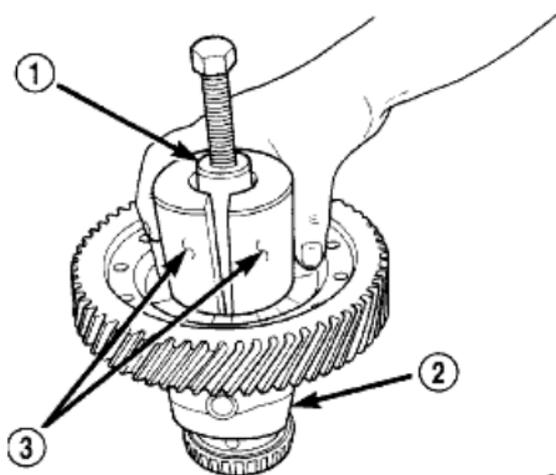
Removing Differential Bearing Cone On Extension Housing Side
